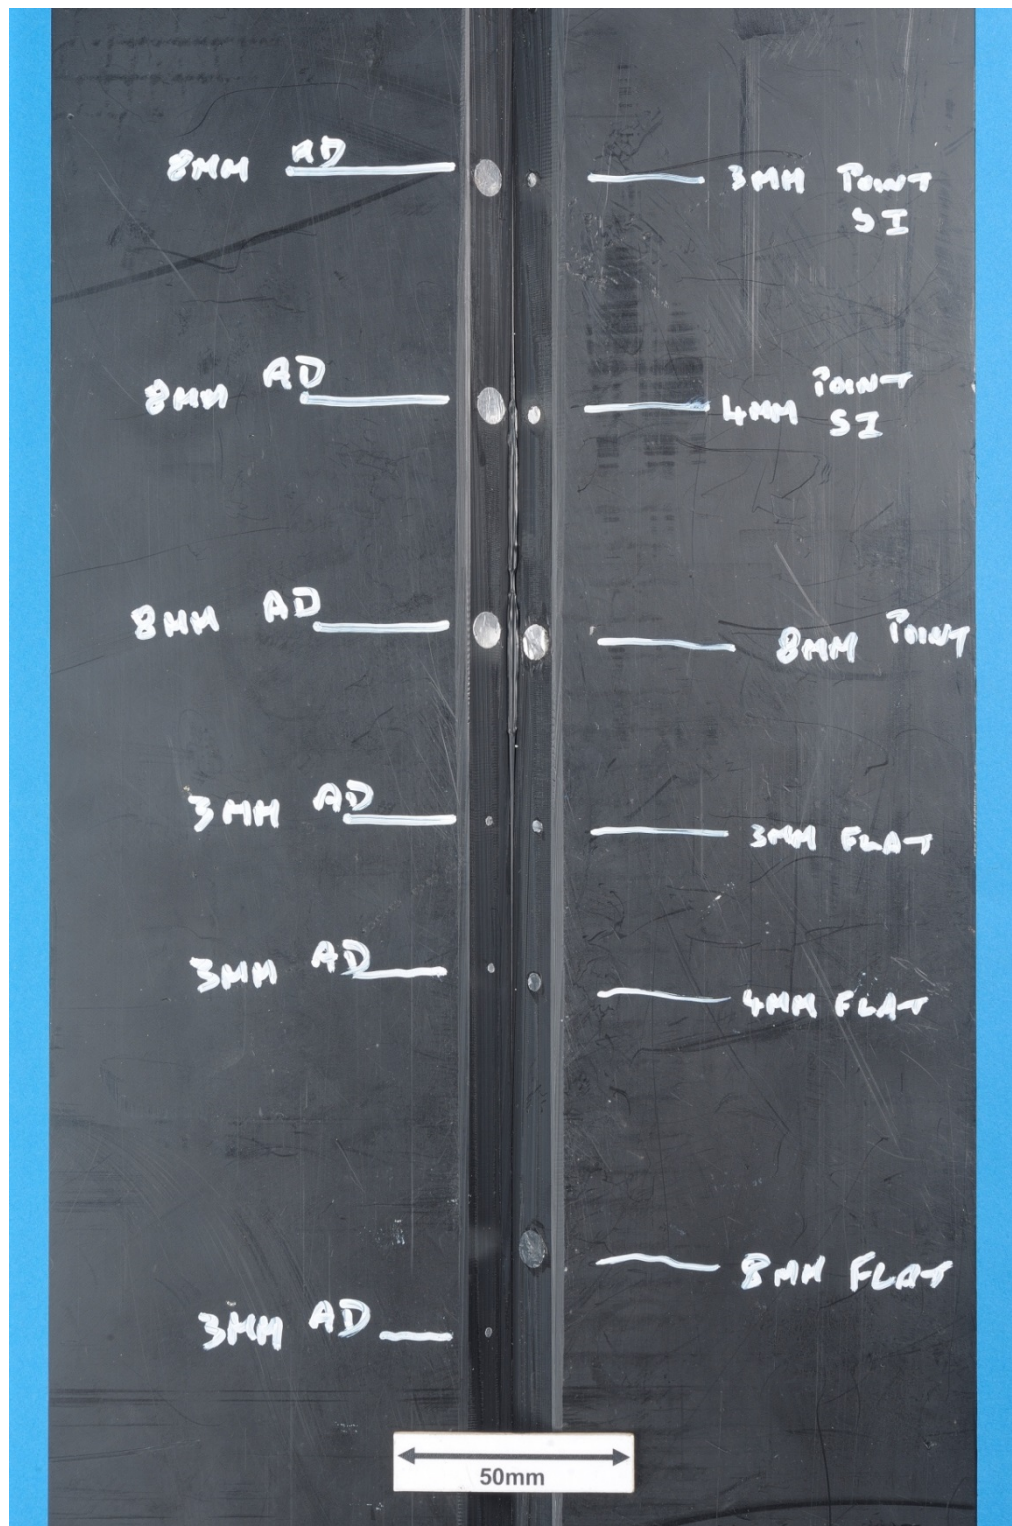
Example of double-V sample with aluminium discs in place and marked up ready for extrusion welding.
